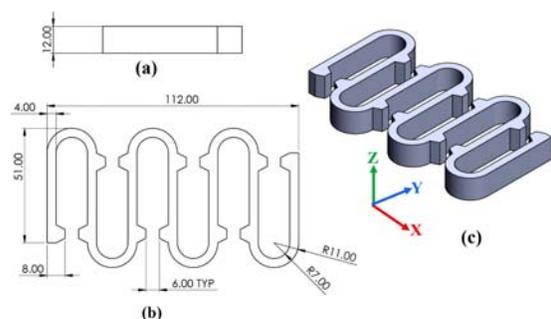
The 4D-printed spring CAD model: a) side view; b) upper view; c) isometric view (designed with SolidWorks 2019)
